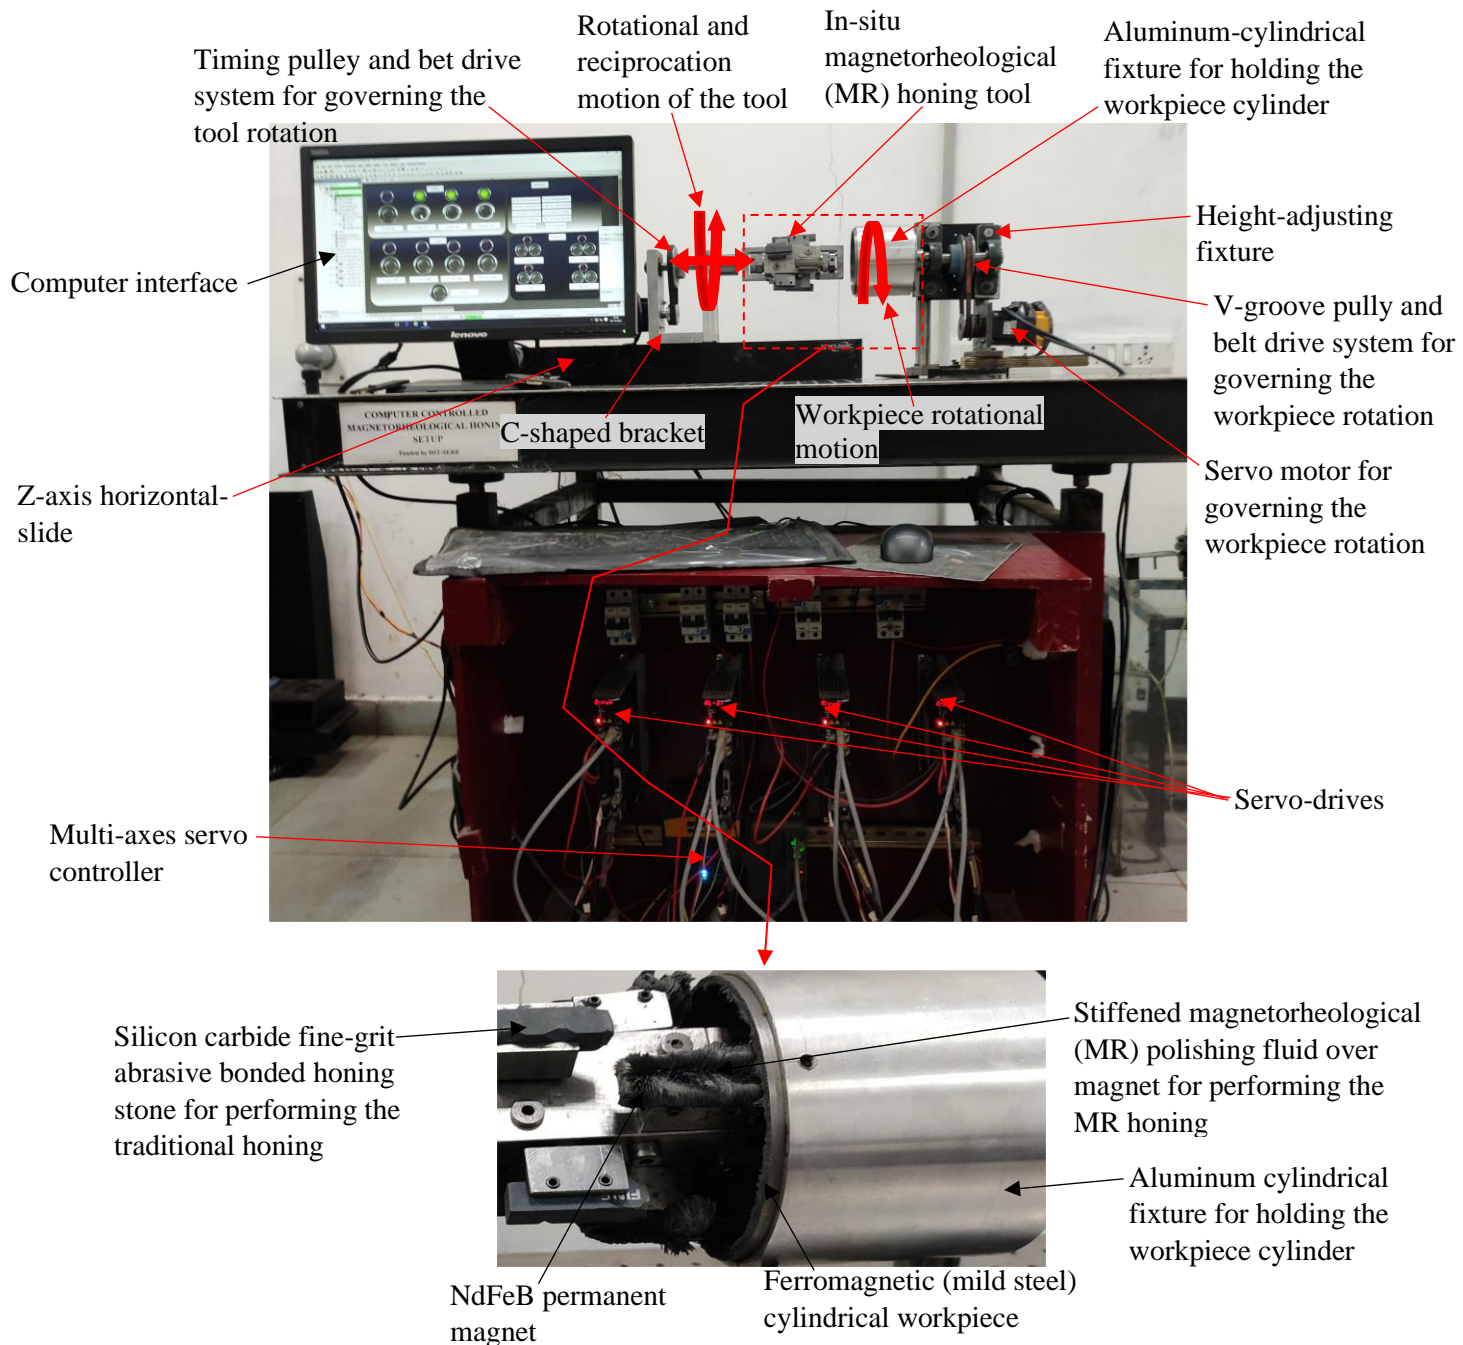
Photograph of the experimental setup used for finishing the internal cylindrical surface of the workpiece through the novel designed in-situ magnetorheological honing tool.
